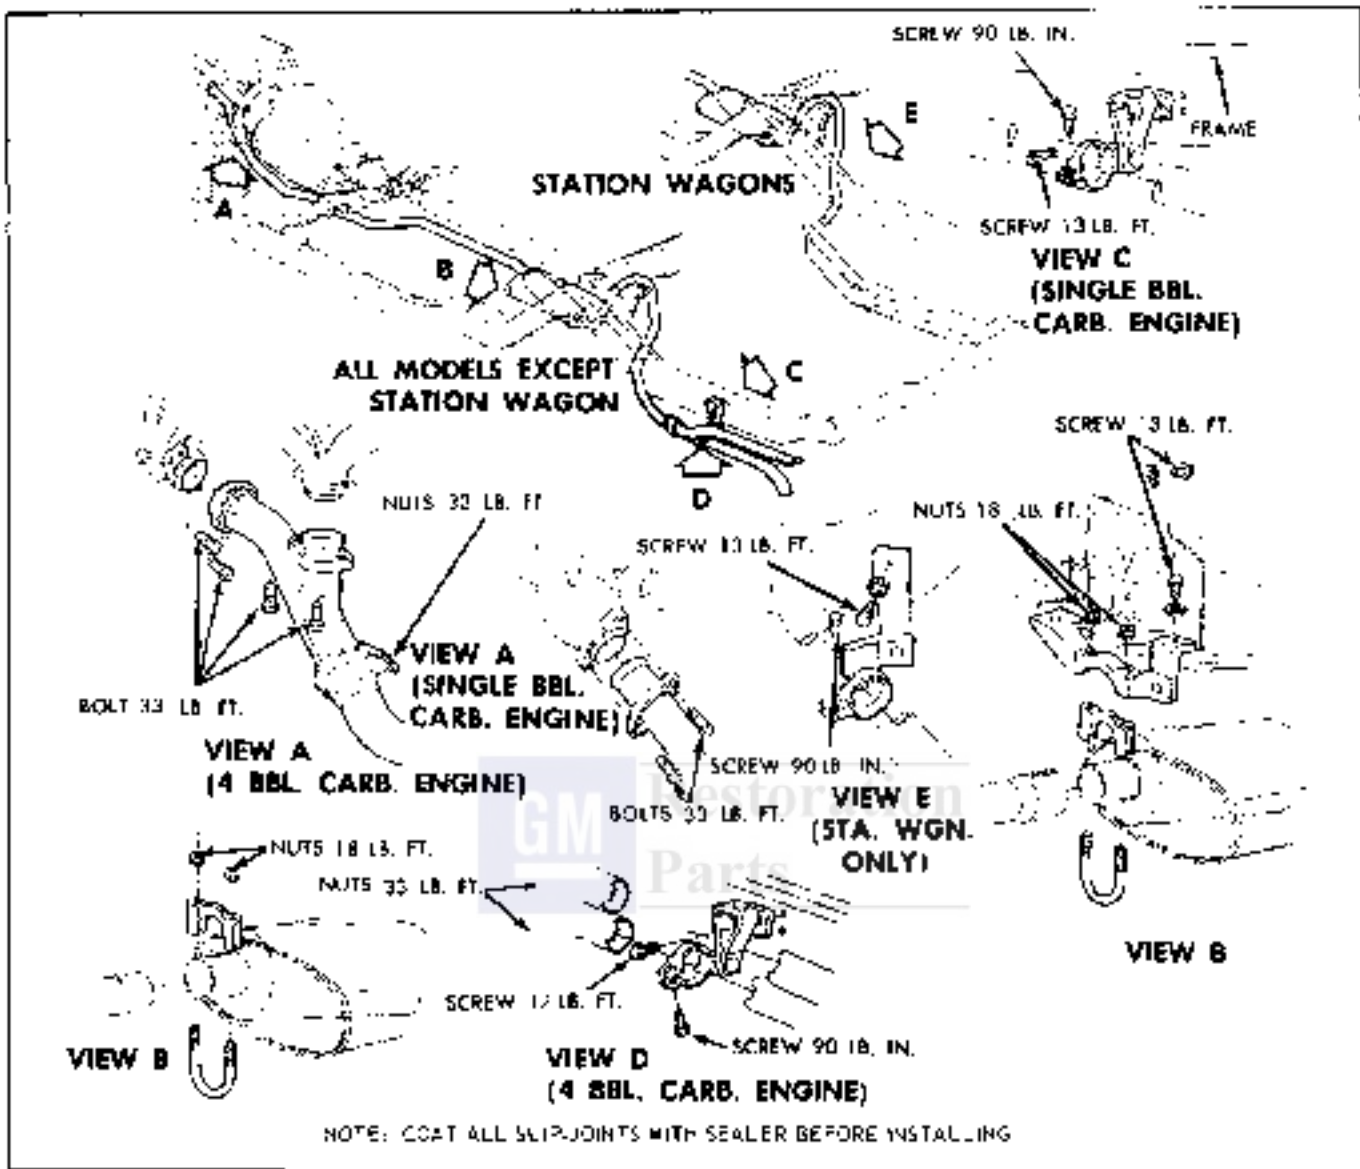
Tempco Six-Cylinder Exhaust System
